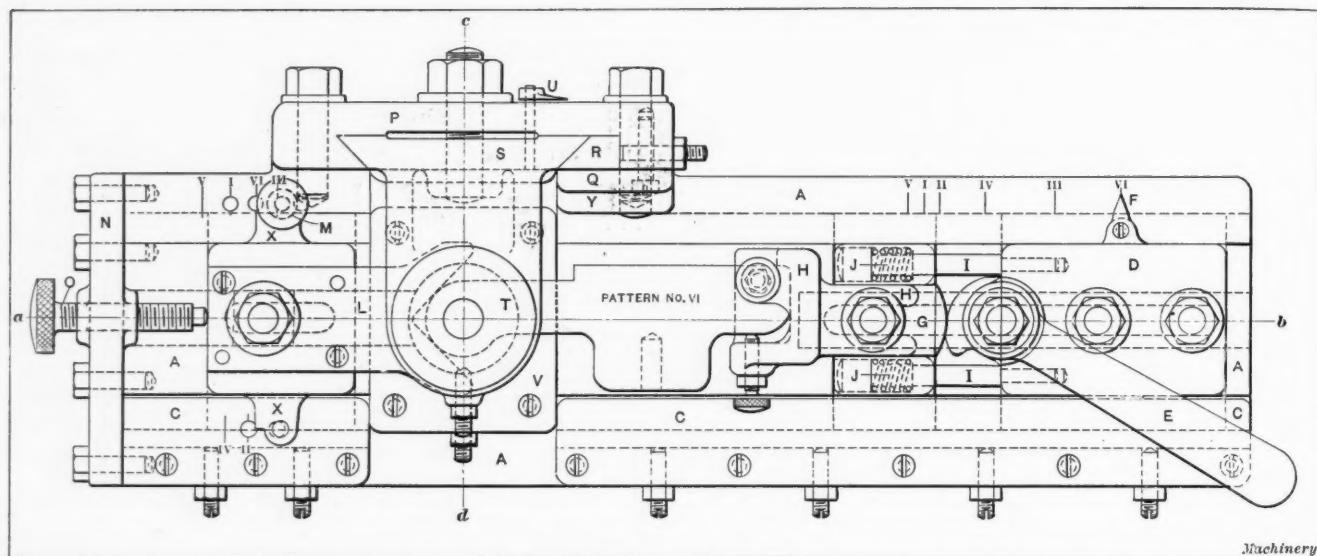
Plan View of the Jig, showing Adjustable Slides for holding Different Kinds of Work
